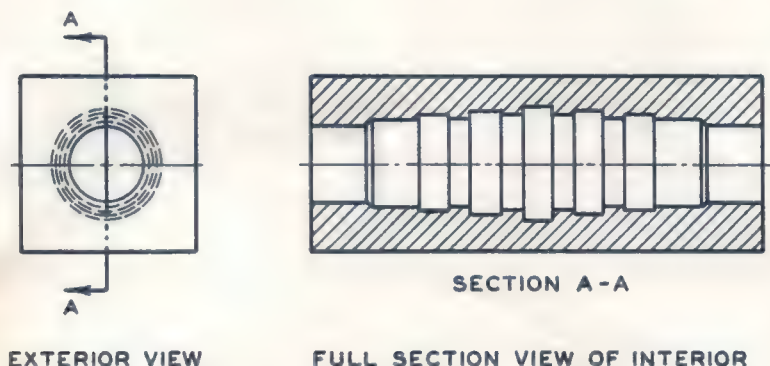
SECTION VIEWS SIMPLIFY INTERNAL DETAILS
